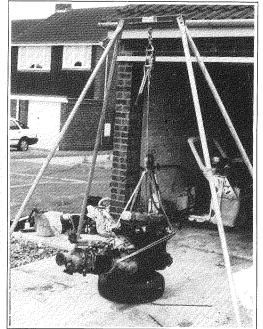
Beg or borrow an engine hoist and park the engine in place. Hoist up...
